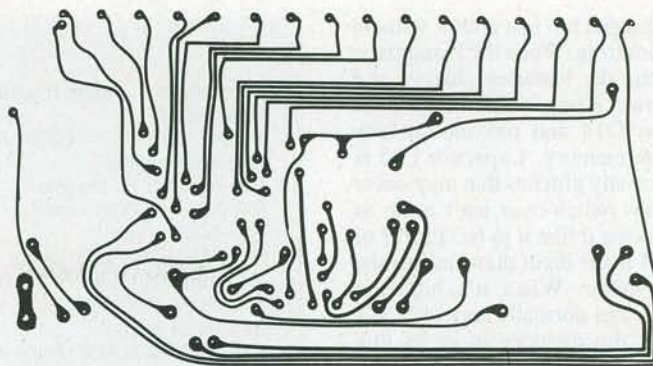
FOR SIMPLICITY IN MAKING THE BOARDS, neither of the double-sided boards uses plated-through holes. The foil pattern for the component side of the second double-sided board, Board 2, is shown here. Once again, that board is shown here half-size.
